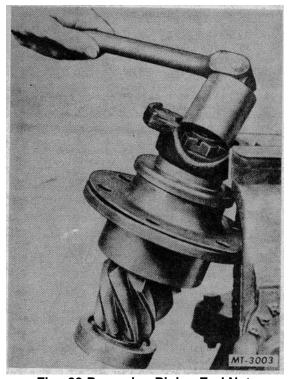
Removing Pinion End Nut (rear rear axle shown).
